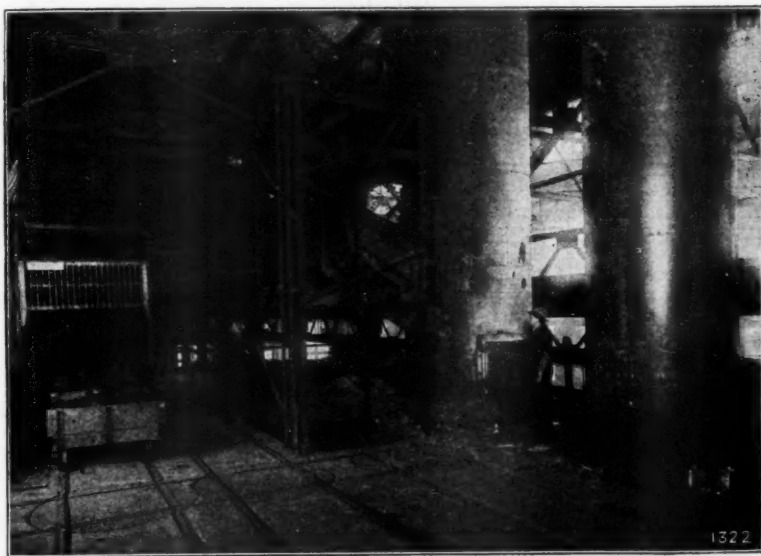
INSTALLATION OF ELECTRIC COMPOUND CHARGING MACHINE, D. L.
